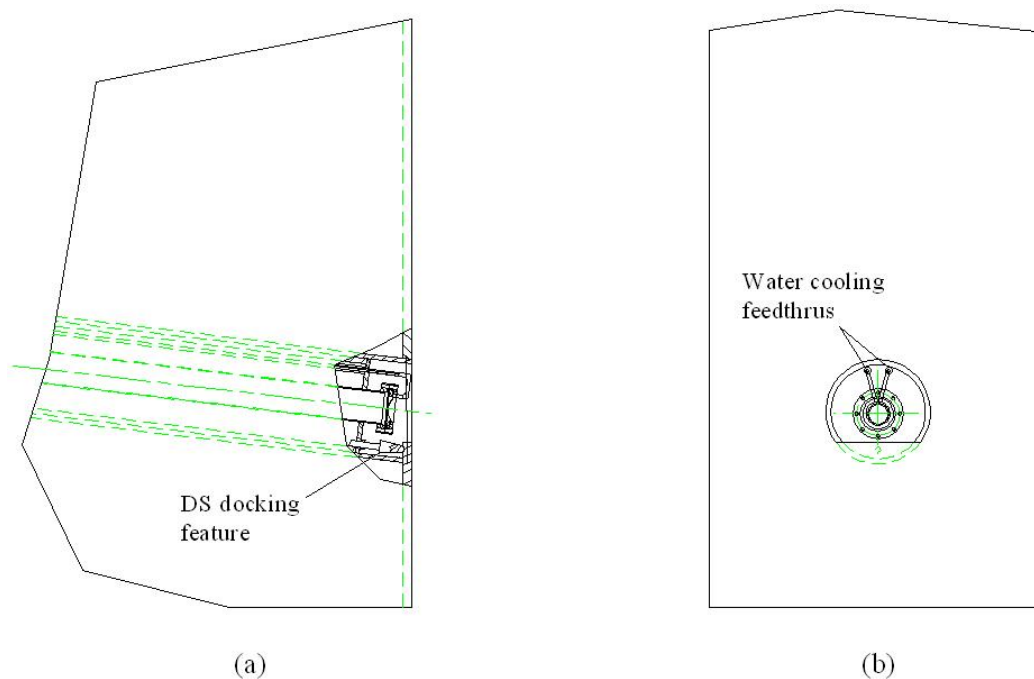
Section view of replacement window assembly. (b): End view of window assembly.
